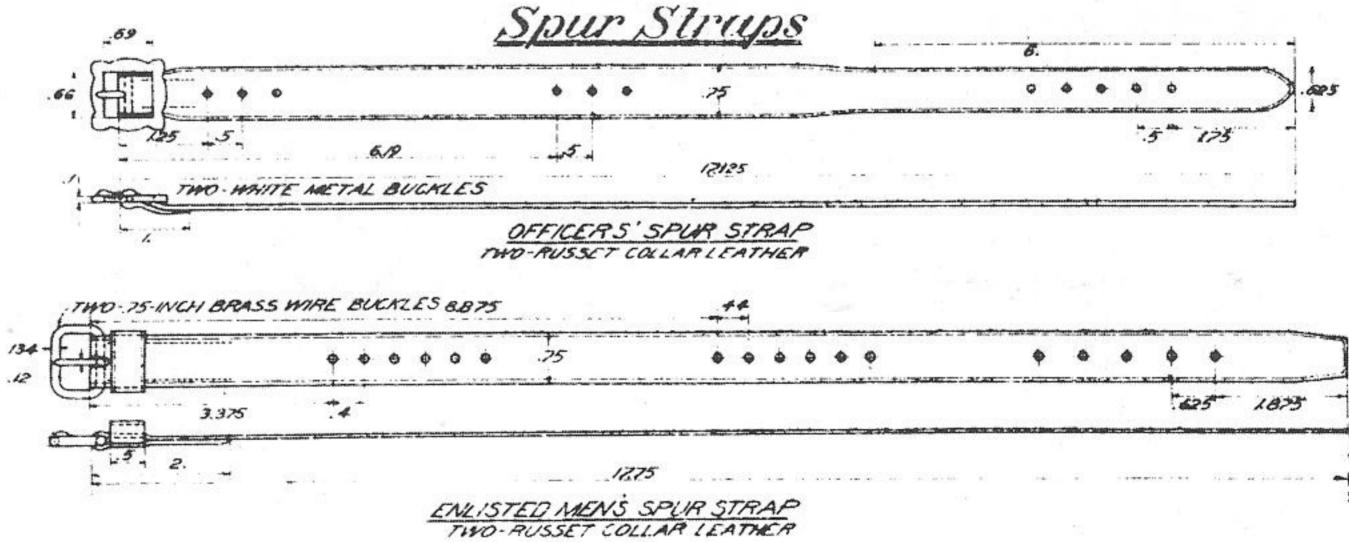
Reprinted directly from the 1905 "Horse Equipments and Equipments for Officers and Enlisted Men" (Ref. 9), these drawings clearly show the two types of Model 1903 Spurs and Spur Straps.
